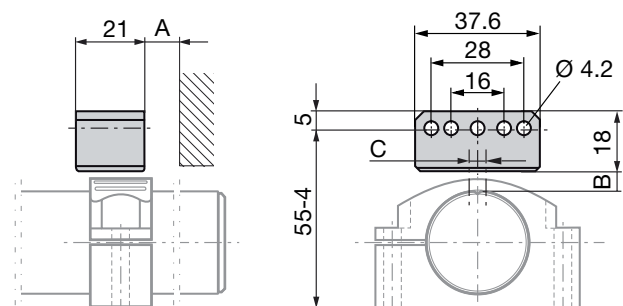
Dimensions and spacing with magnet BTL6-A-3801-2
